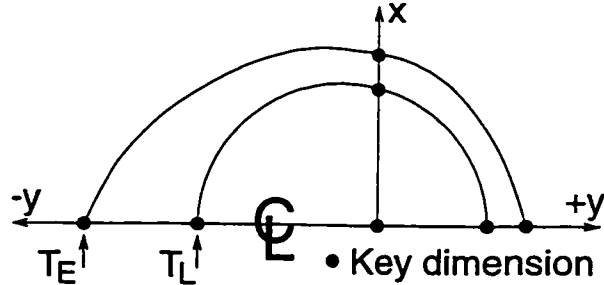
Schematic of weld pool indicating key dimensions.
